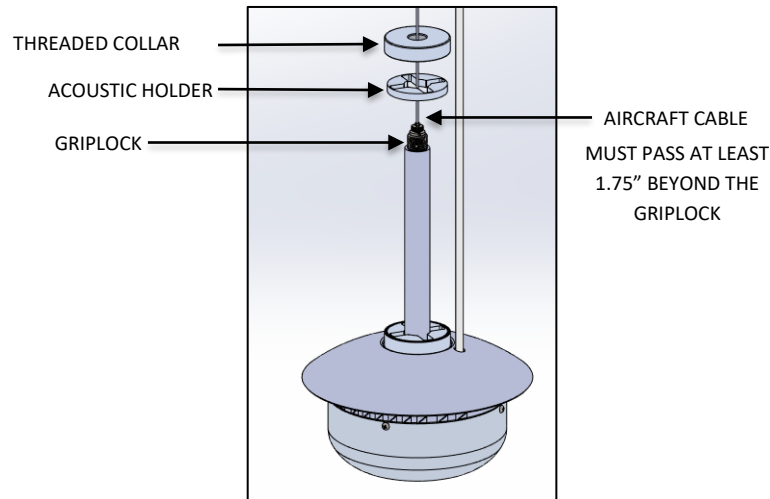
ACOUSTIC PANEL HOLDER ASSEMBLY
